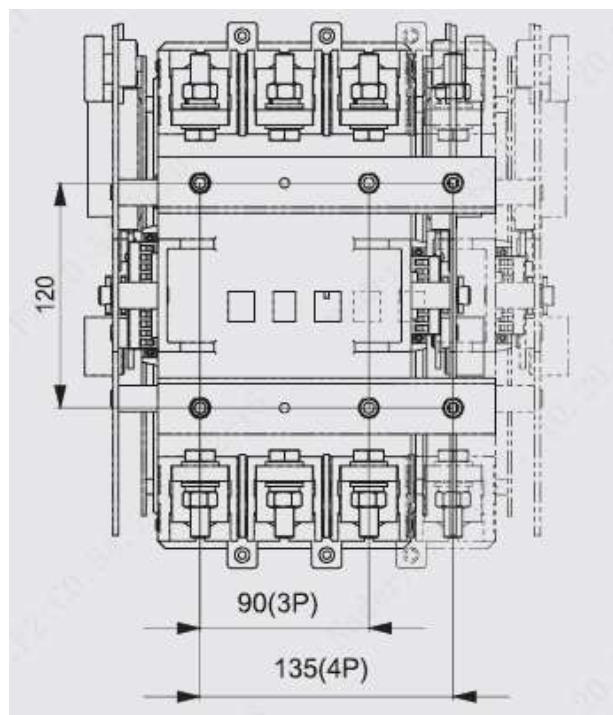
Drawing of hole size of mounting plate of withdrawable rear socket
